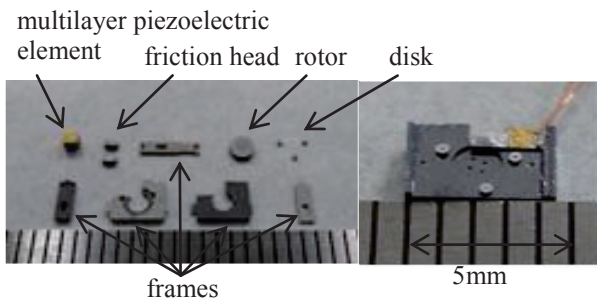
Fabricated components and the assembled friction drive MEMS rotary actuator
